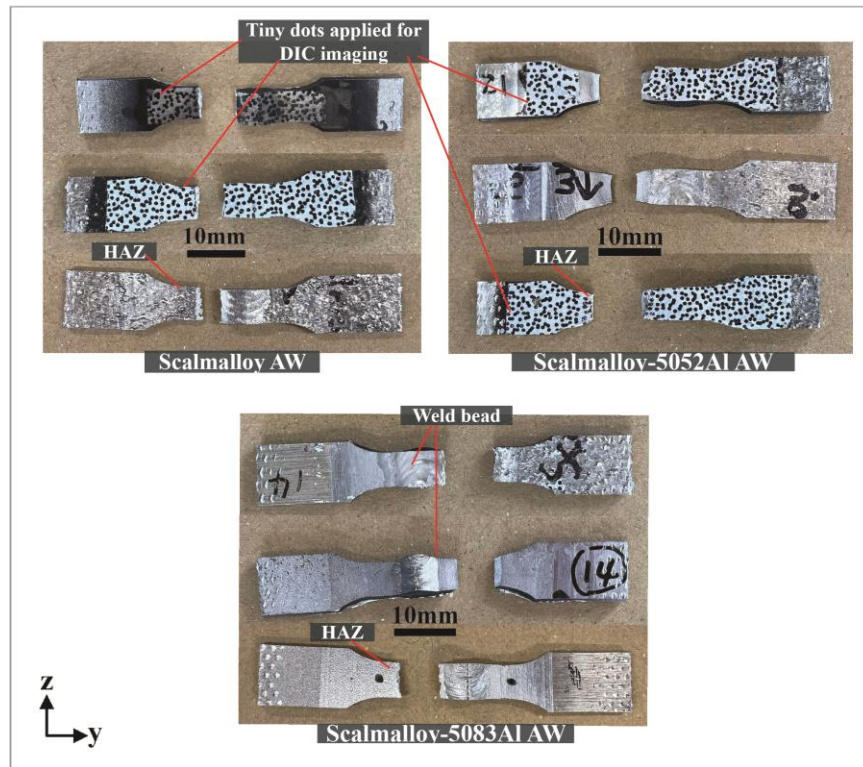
Macrostructures of As Welded tensile samples
